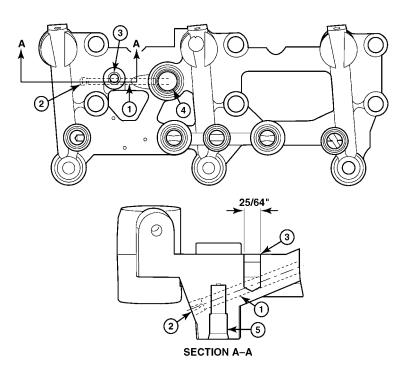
Engine Brake Unit Part No. 757GB58 Top Oil Feed Port
